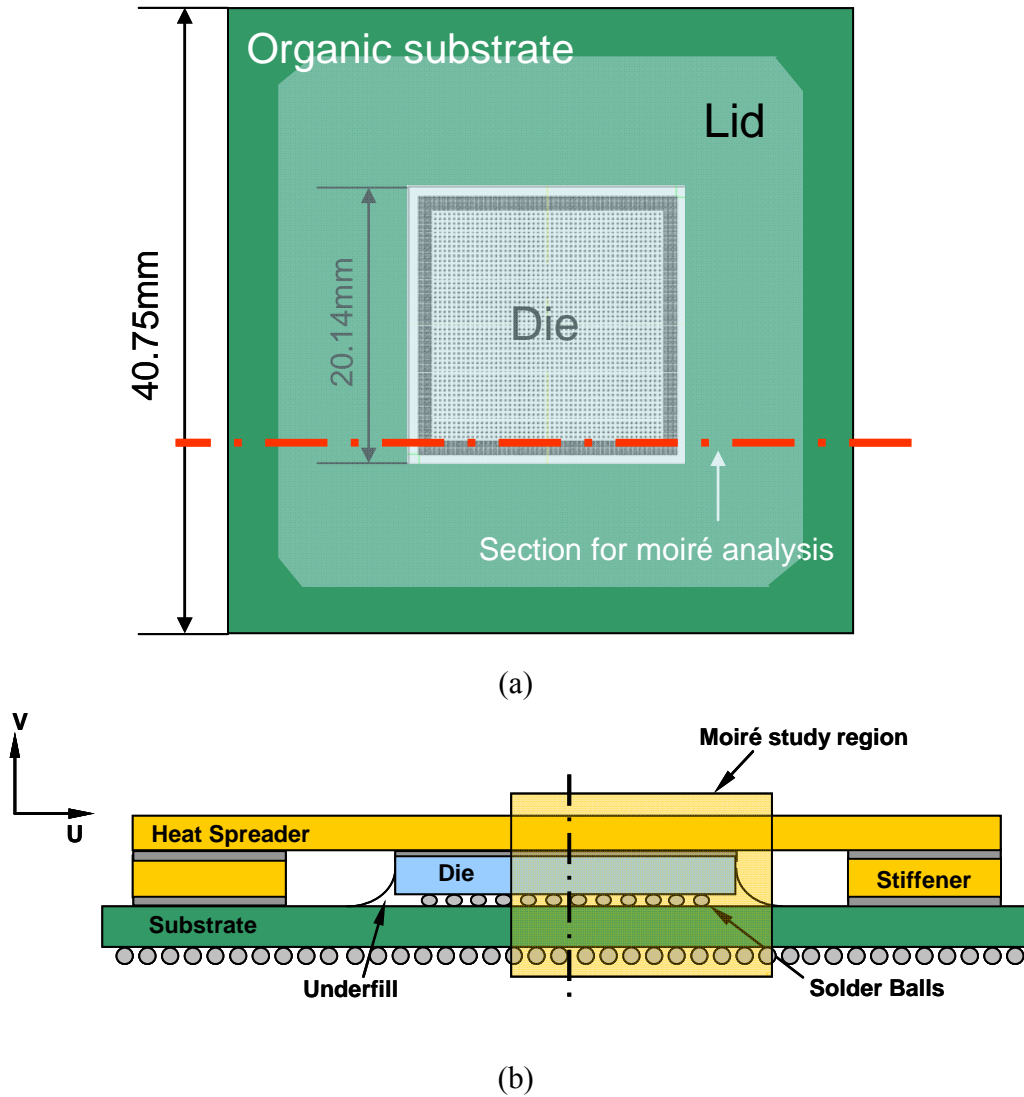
Schematics of flip-chip packages with lid as a heat spreader (a) top view (b) cross-sectional view along the red line
